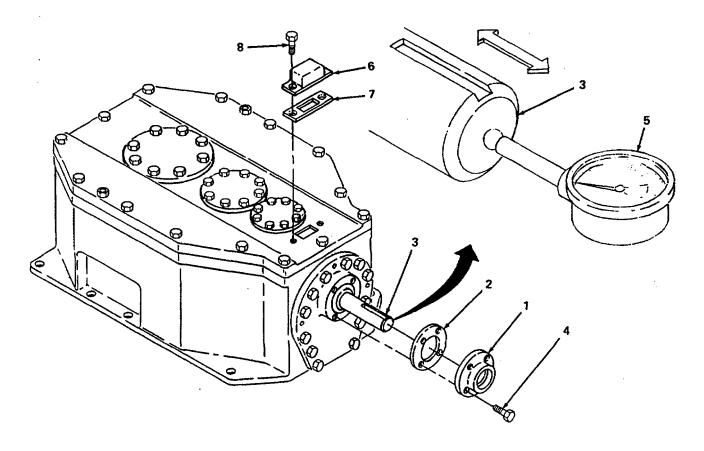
Adjusting Axial Float of High Speed Shaft.
